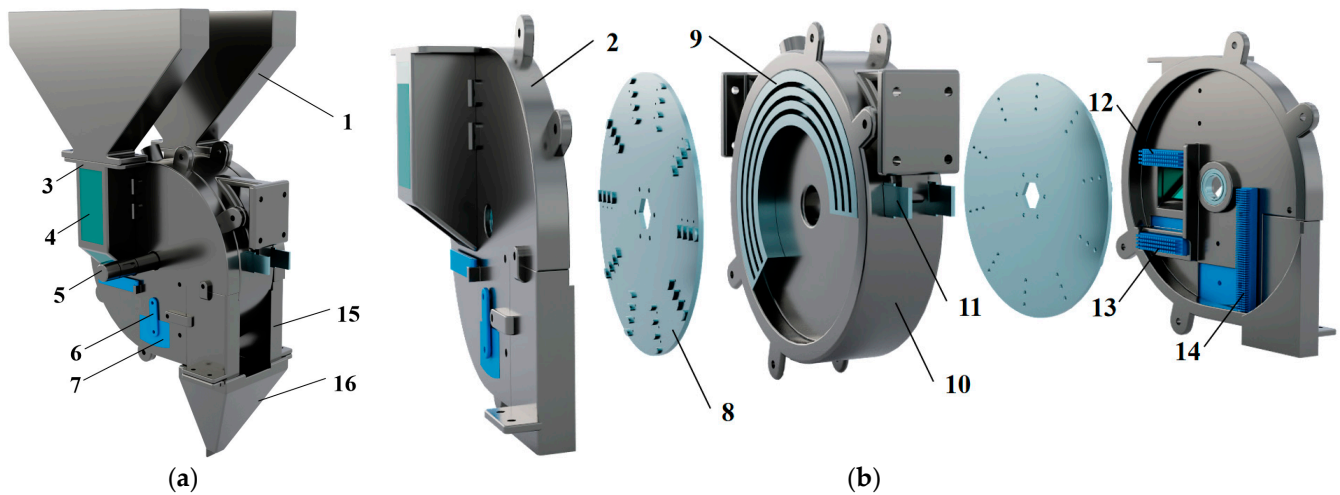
Schematic of the seed metering device. 1. Seed hopper. 2. Seed metering device casing. 3. Seed feed tube. 4. Viewing panel. 5. Seed metering shaft. 6. Connector. 7. Seed discharge plate. 8. Adjustable multi-hole seed metering disc. 9. Branched air chamber casing. 10. Intermediate air chamber casing. 11. Air chamber control board. 12. Seed cleaning brush. 13. Seed separating brush. 14. Debris cleaning brush. 15. Seed metering tube. 16. Seed collection port. (a) Side front view. (b) Internal structure view.
